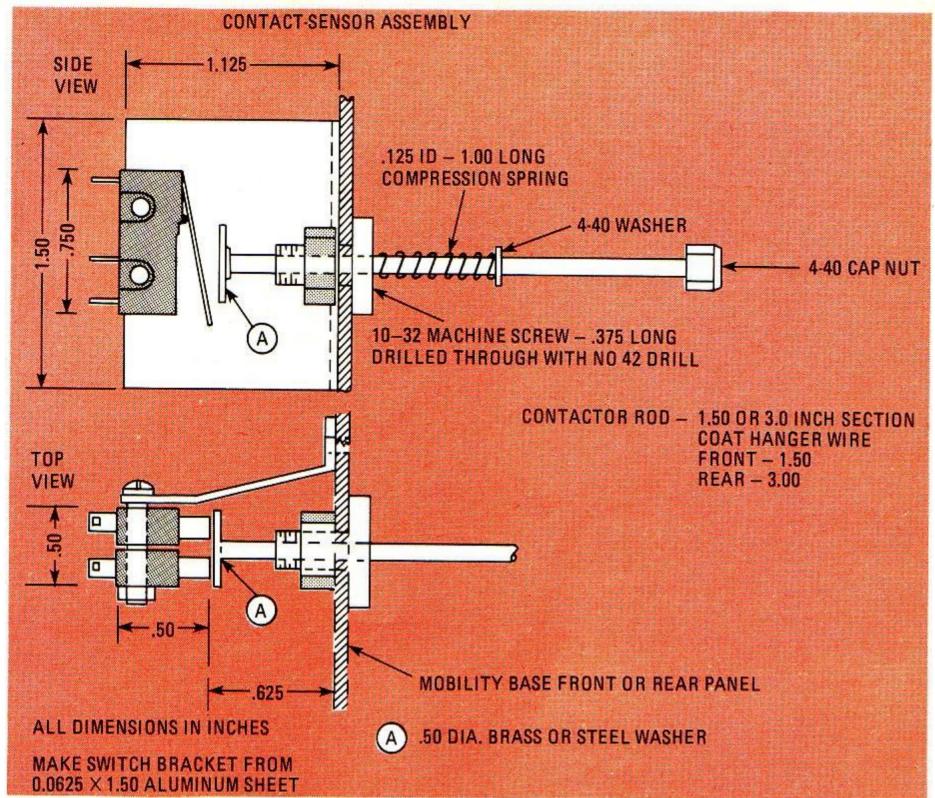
CONTACT SENSOR tells the robot when it has bumped into something. Cap nut at end of rod should be provided with cushioning material (see text).
